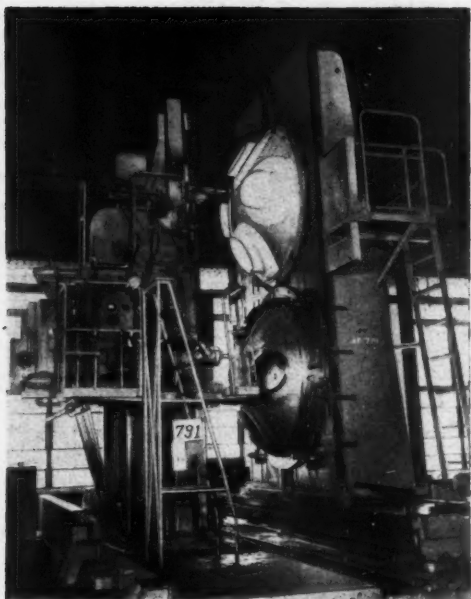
A forged end closure for a rocket motor case is here being contour-milled on a Pratt & Whitney Keller die sinking machine
